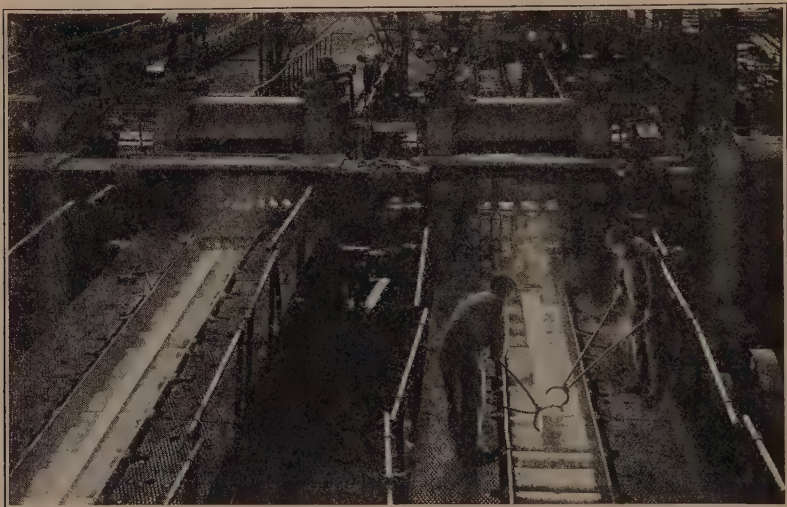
This picture shows how a railroad rail is shaped. The steel is heated until it is white-hot; this is rolled back and forth through the heavy mills until it is pressed into the desired shape. In this way many steel parts are made. (Courtesy of the Bethlehem Steel Company)
